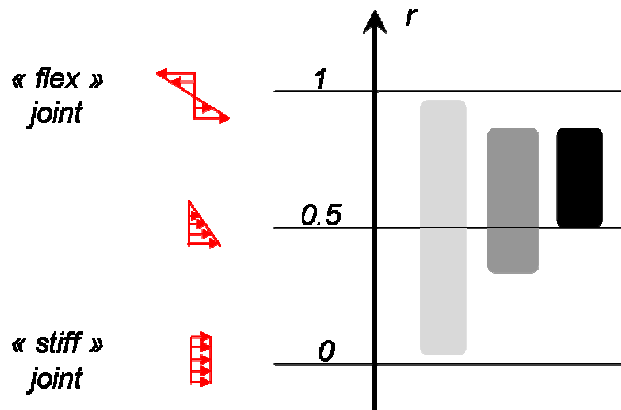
Stress gradient within the sheet thickness, r for: axle parts weld assemblies (light grey), fatigue test specimens considered by [\[Fayard & al. \(1996\)\]](#) (dark grey), basic fatigue test specimen (black).
